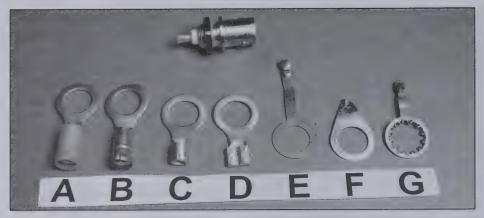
Ring terminals (ABCD) or ground lugs (EFG) can be used to mount BNC connectors to PCB stock.
